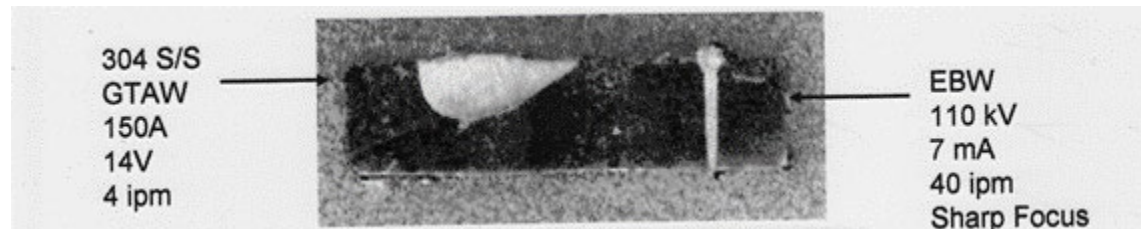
Typical welds made on stainless steel illustrating the differences between “conduction mode” and “deep penetration mode” welds. The EBW process resulted in greater weld penetration while depositing roughly 25 times less heat per unit length of weld. Note: unless otherwise cited, all weld data are from: P. Burgardt, Los Alamos National Laboratory (Ret.).
